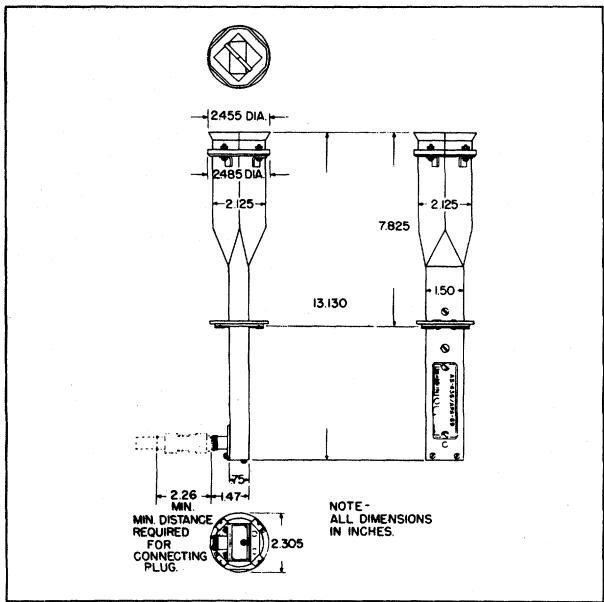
Antenna AS-436/APA-69, Outline and Mounting Dimensions
